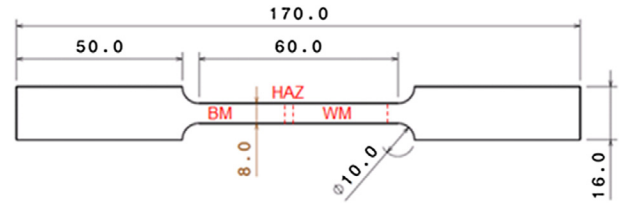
Tensile test specimen dimensions (all dimensions are in millimetres).
